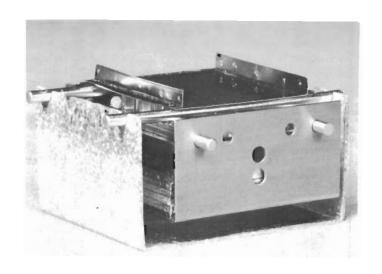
HONEYCOMB SPECIMEN TESTING JIG
